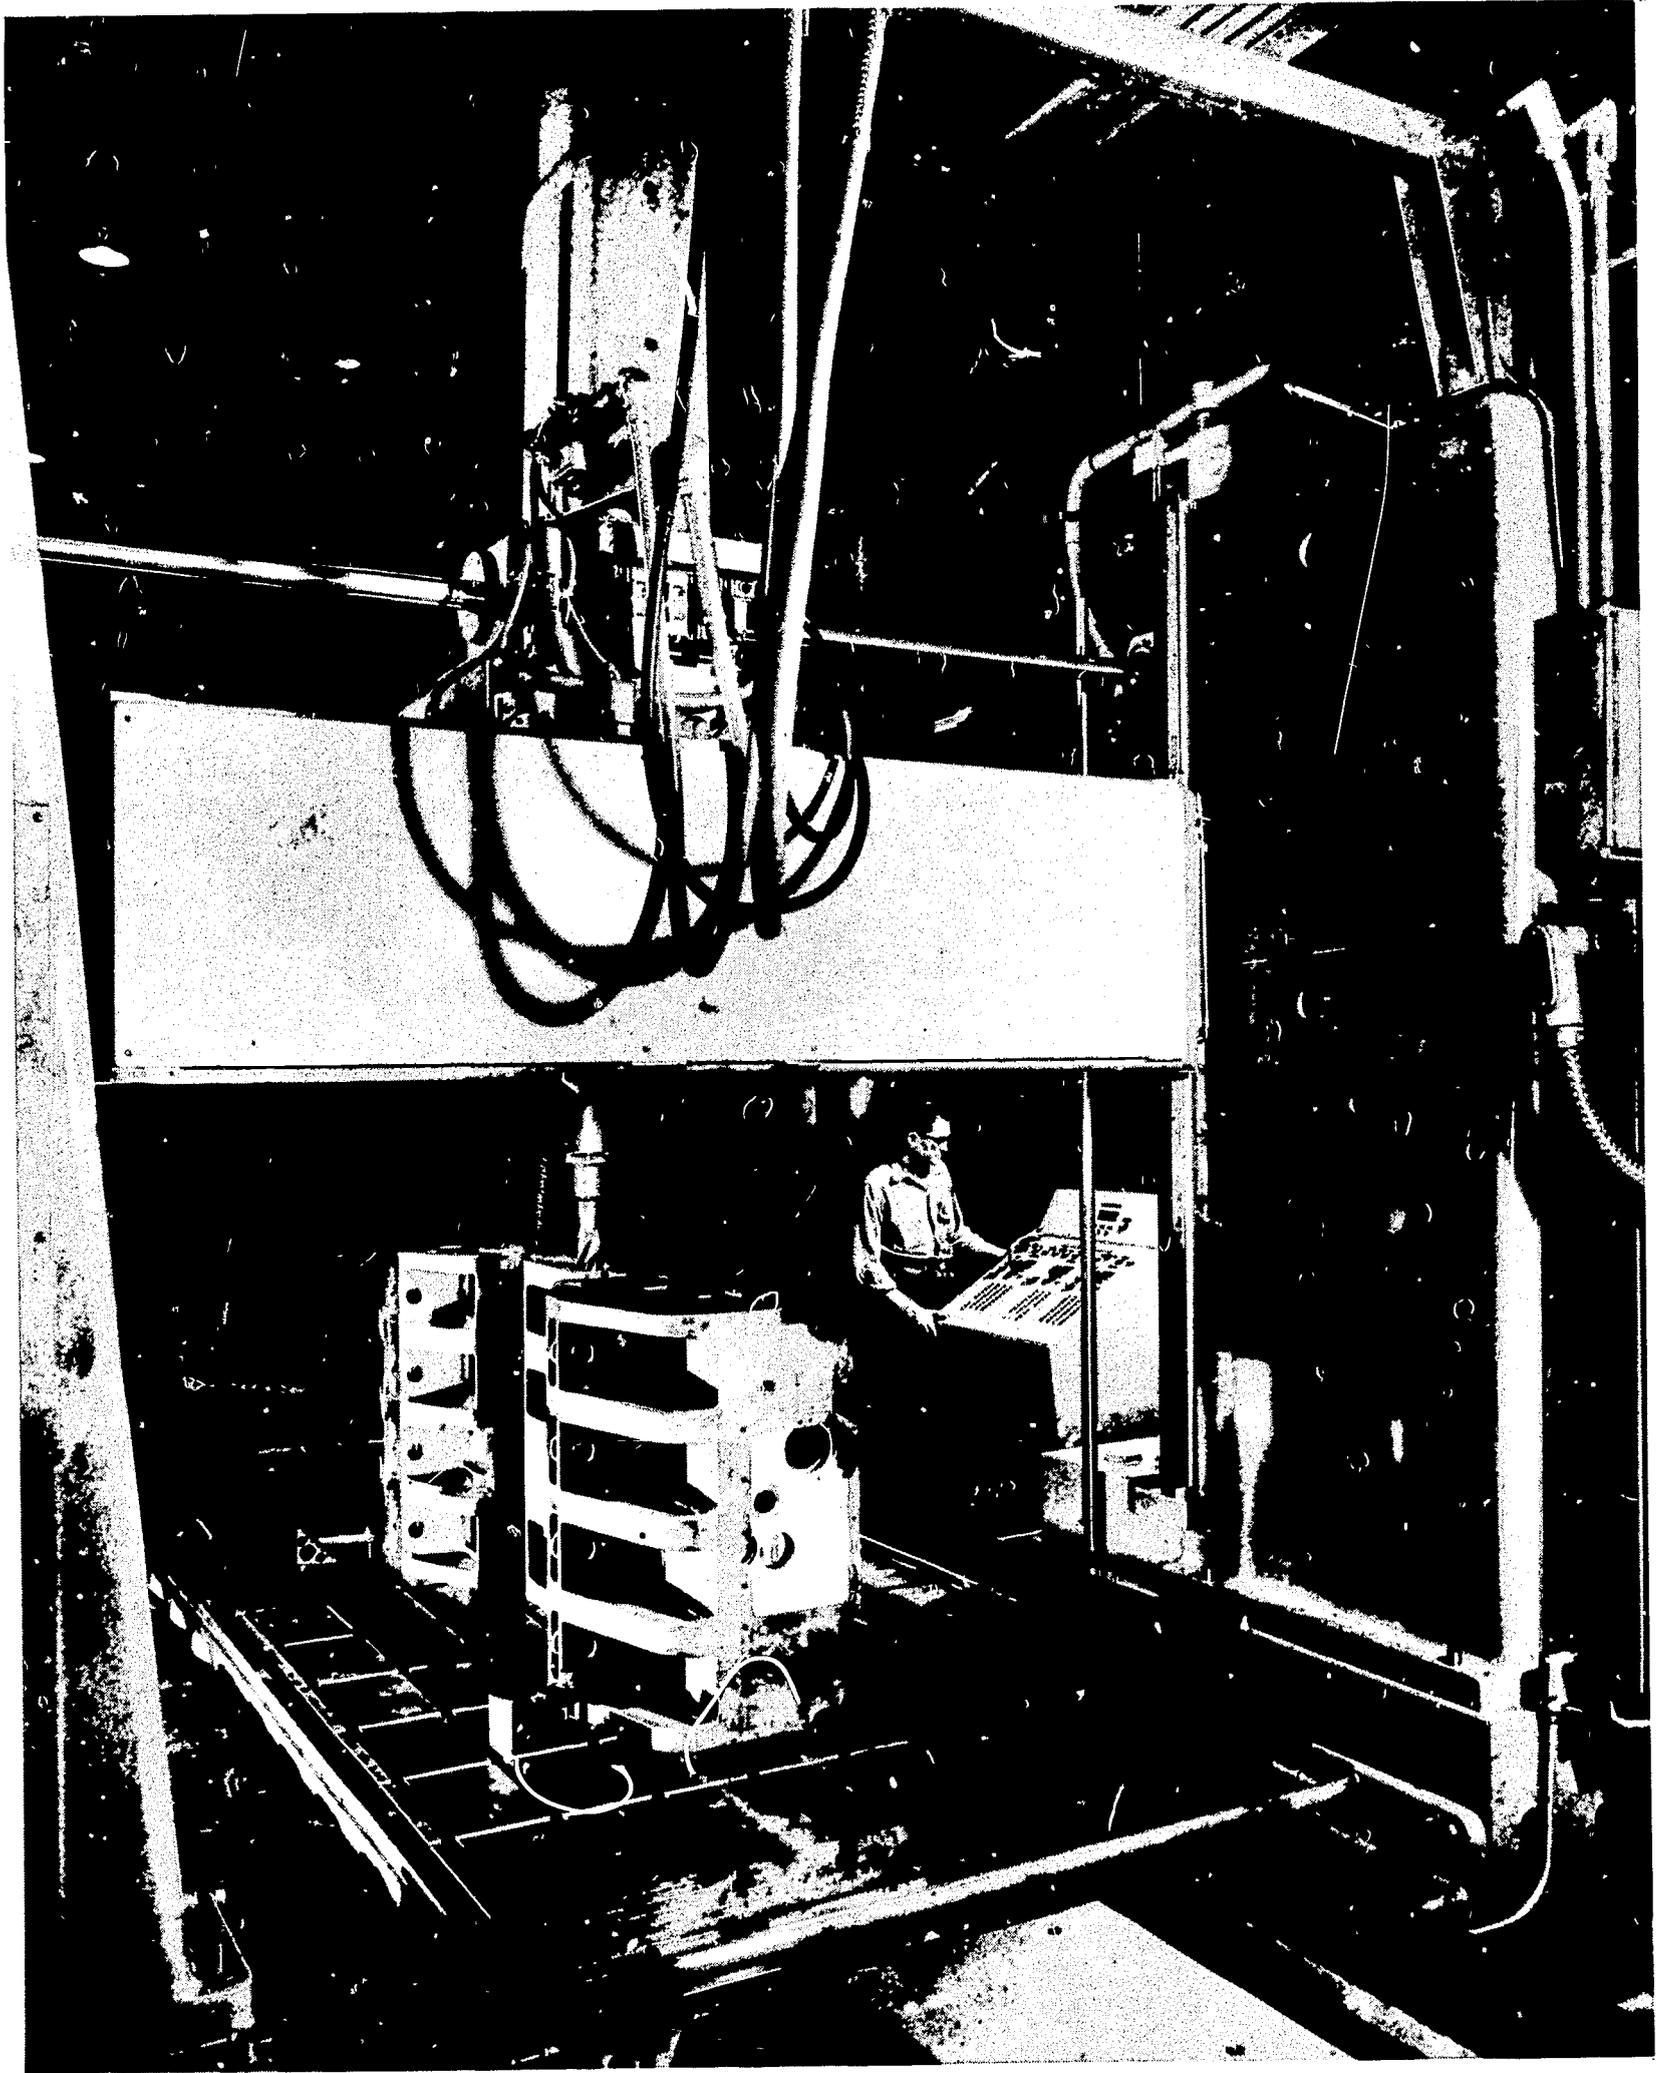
5. A numerically controlled rail-type machine tool with remote operator control console
